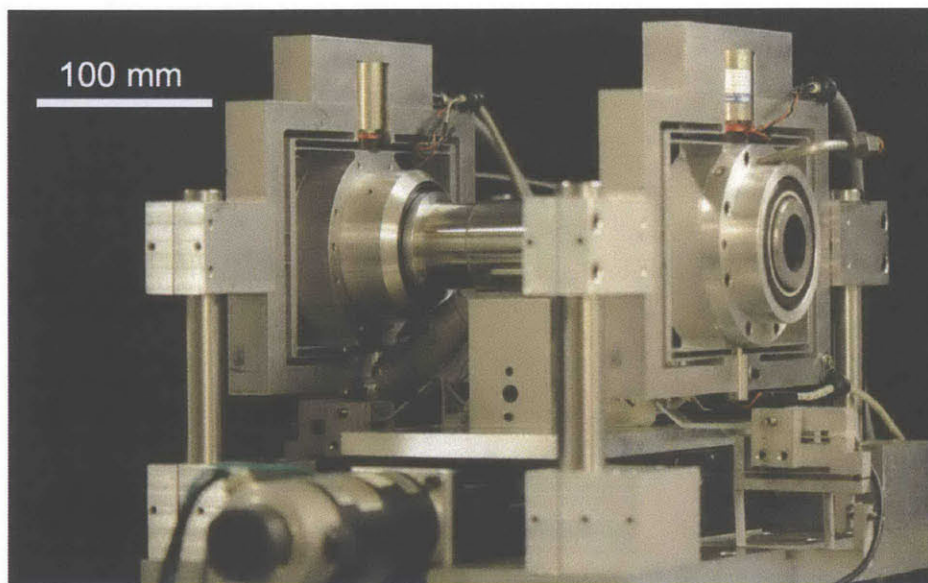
The roll-to-plate microcontact printing machine developed by Petrzelka [19]. This machine utilized parallel kinematic flexure stages to give control over the height and tilt of the print roll. A linear positioning stage below the print roll was designed to carry a wafer or glass microscope slide substrate. An optical prism could be mounted on the linear positioning stage, allowing for real-time in-situ visualization of the contact region between the round stamp and flat substrate.
